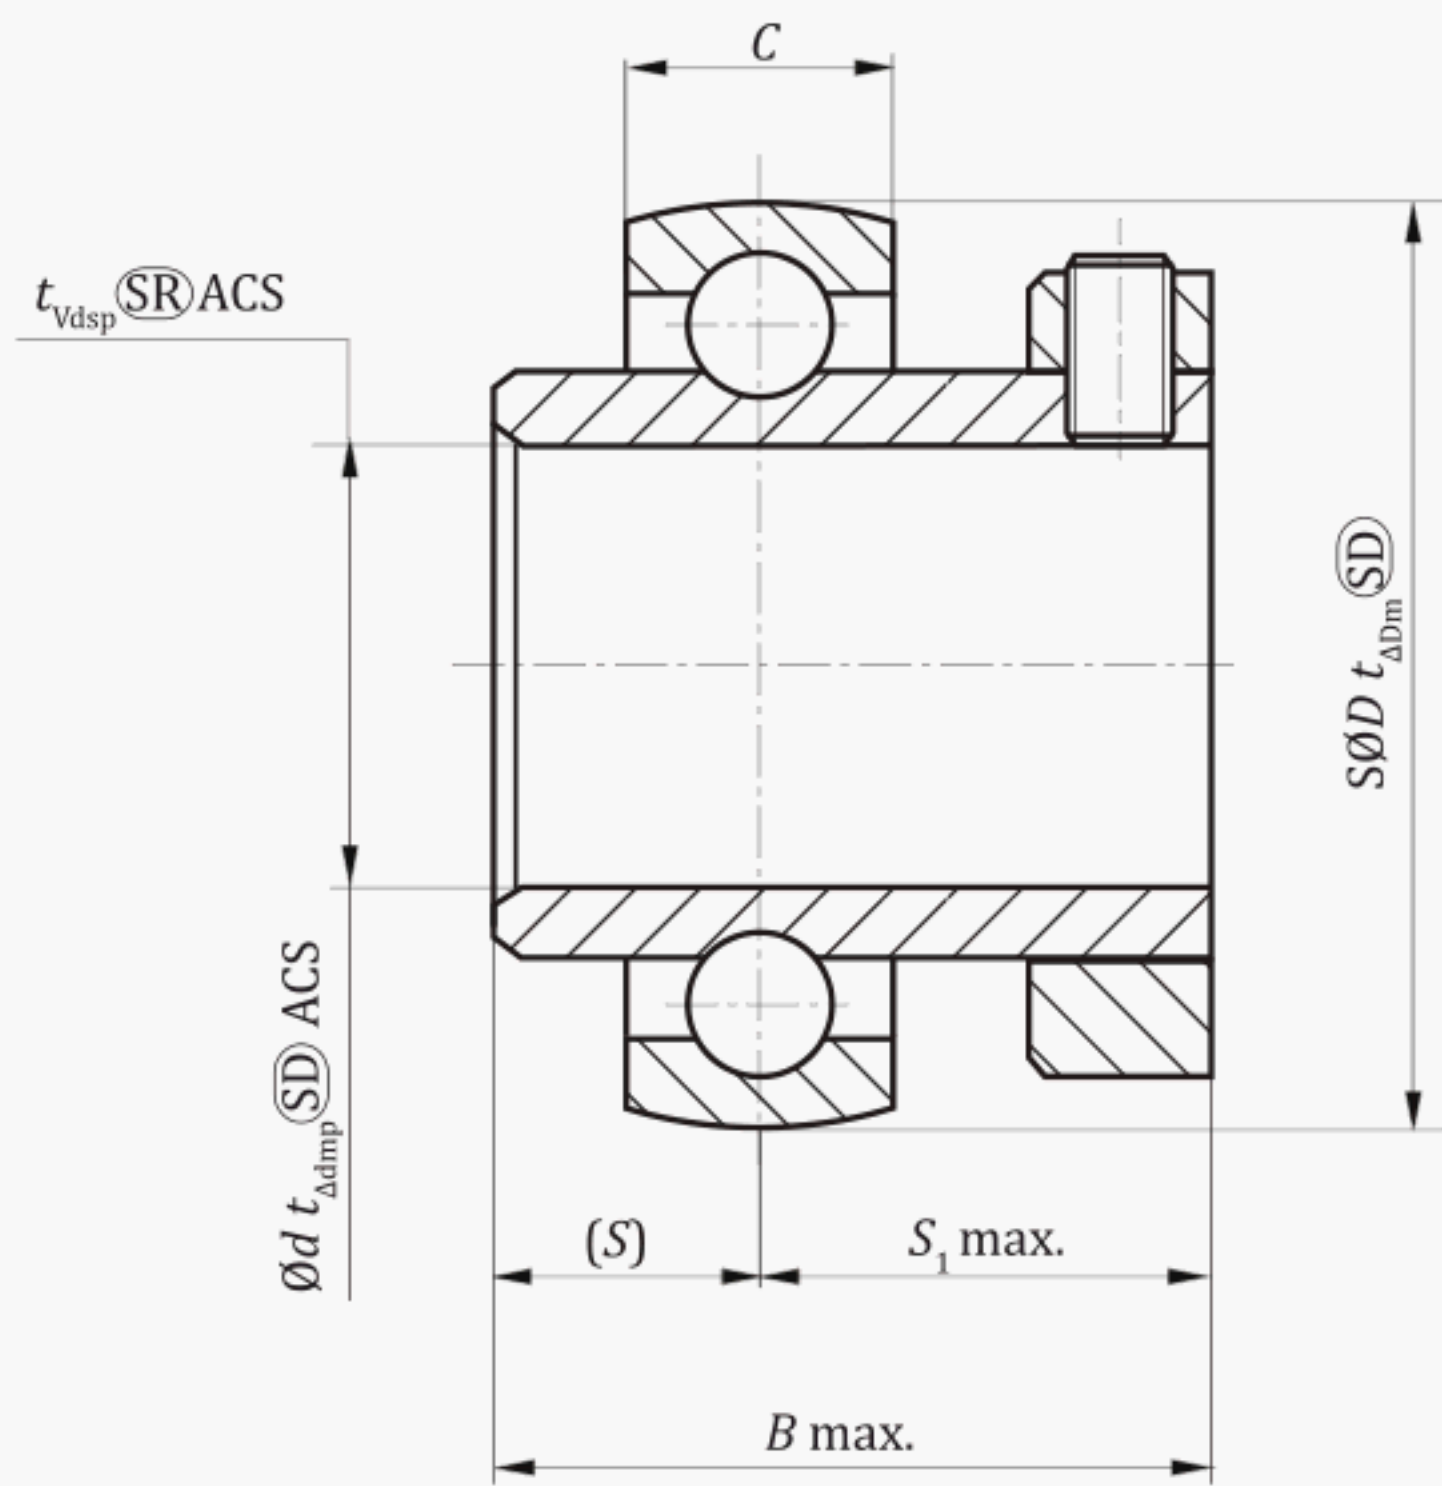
Bearing with concentric locking collar around the inner ring — Intermediate overall width
